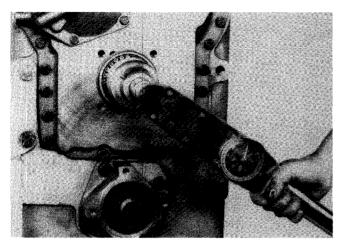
Install idler shaft rear bearing retainer nut. Tighten to specified torque. (See elastic stop nut torque chart).
